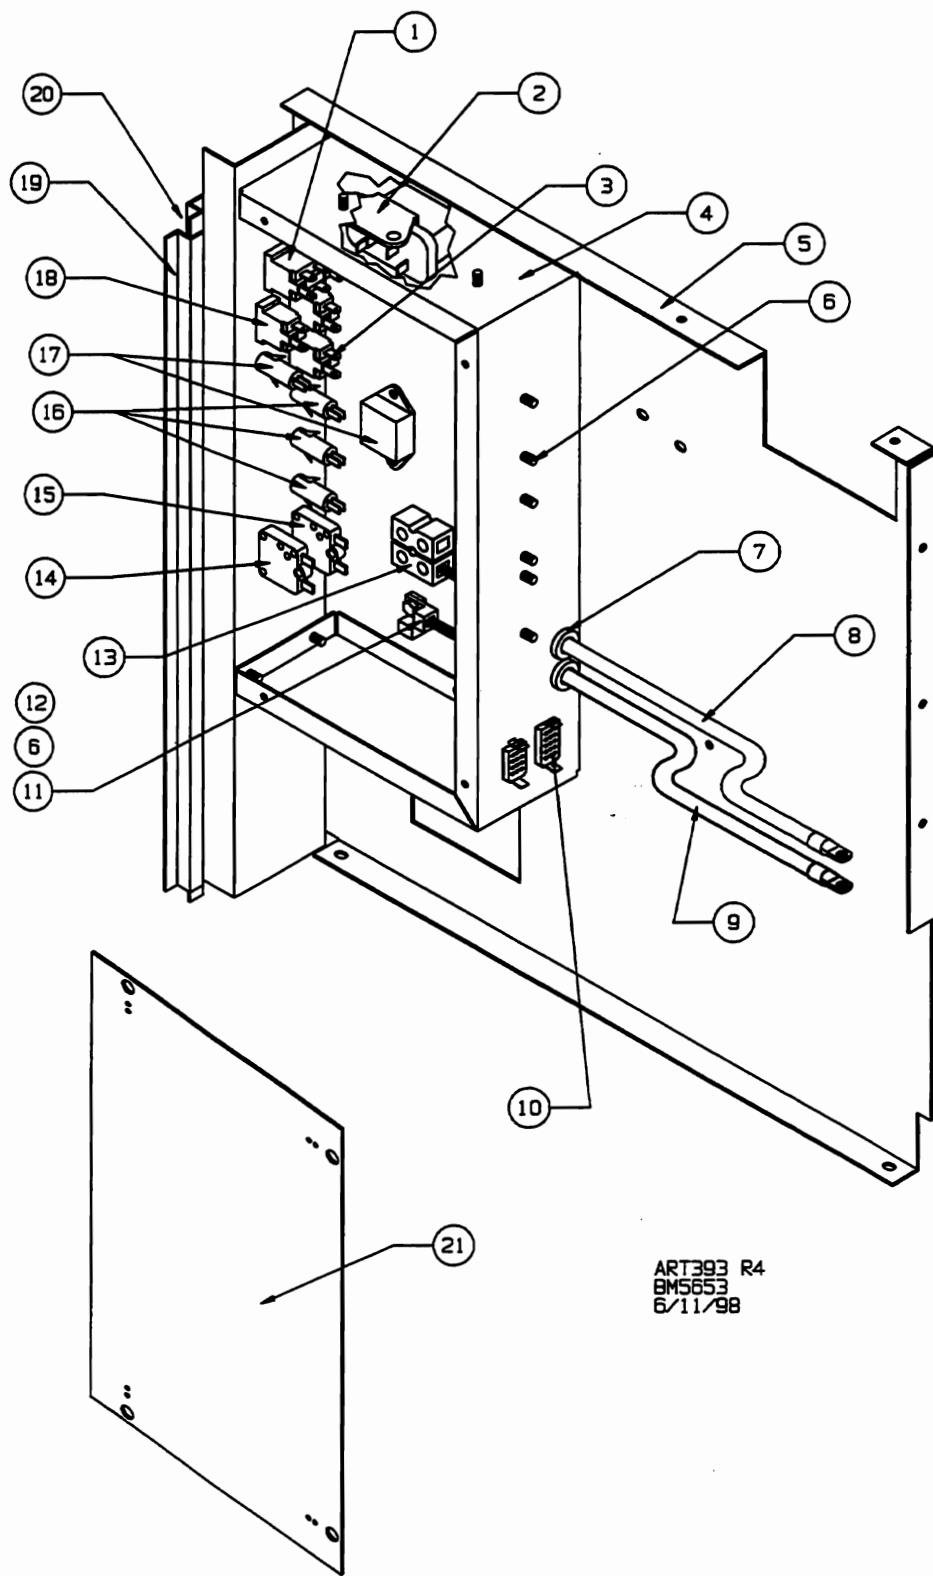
P - Engine Bulkhead Assembly - Dual Fuel
